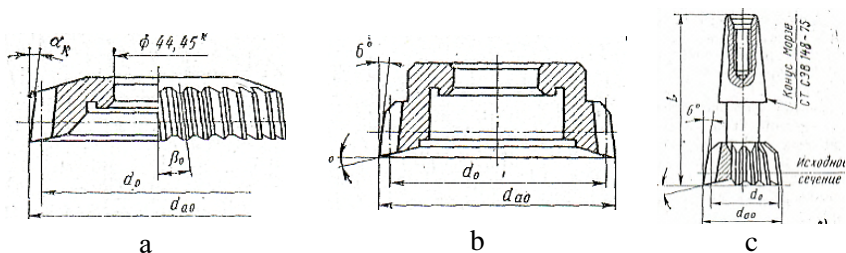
Types of shaper gear cutters: a – disk-type;
